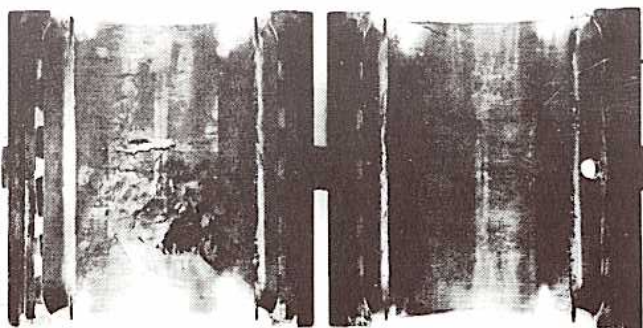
Lemon bore bearing seizure on start-up due to inadequate vertical clearance.
